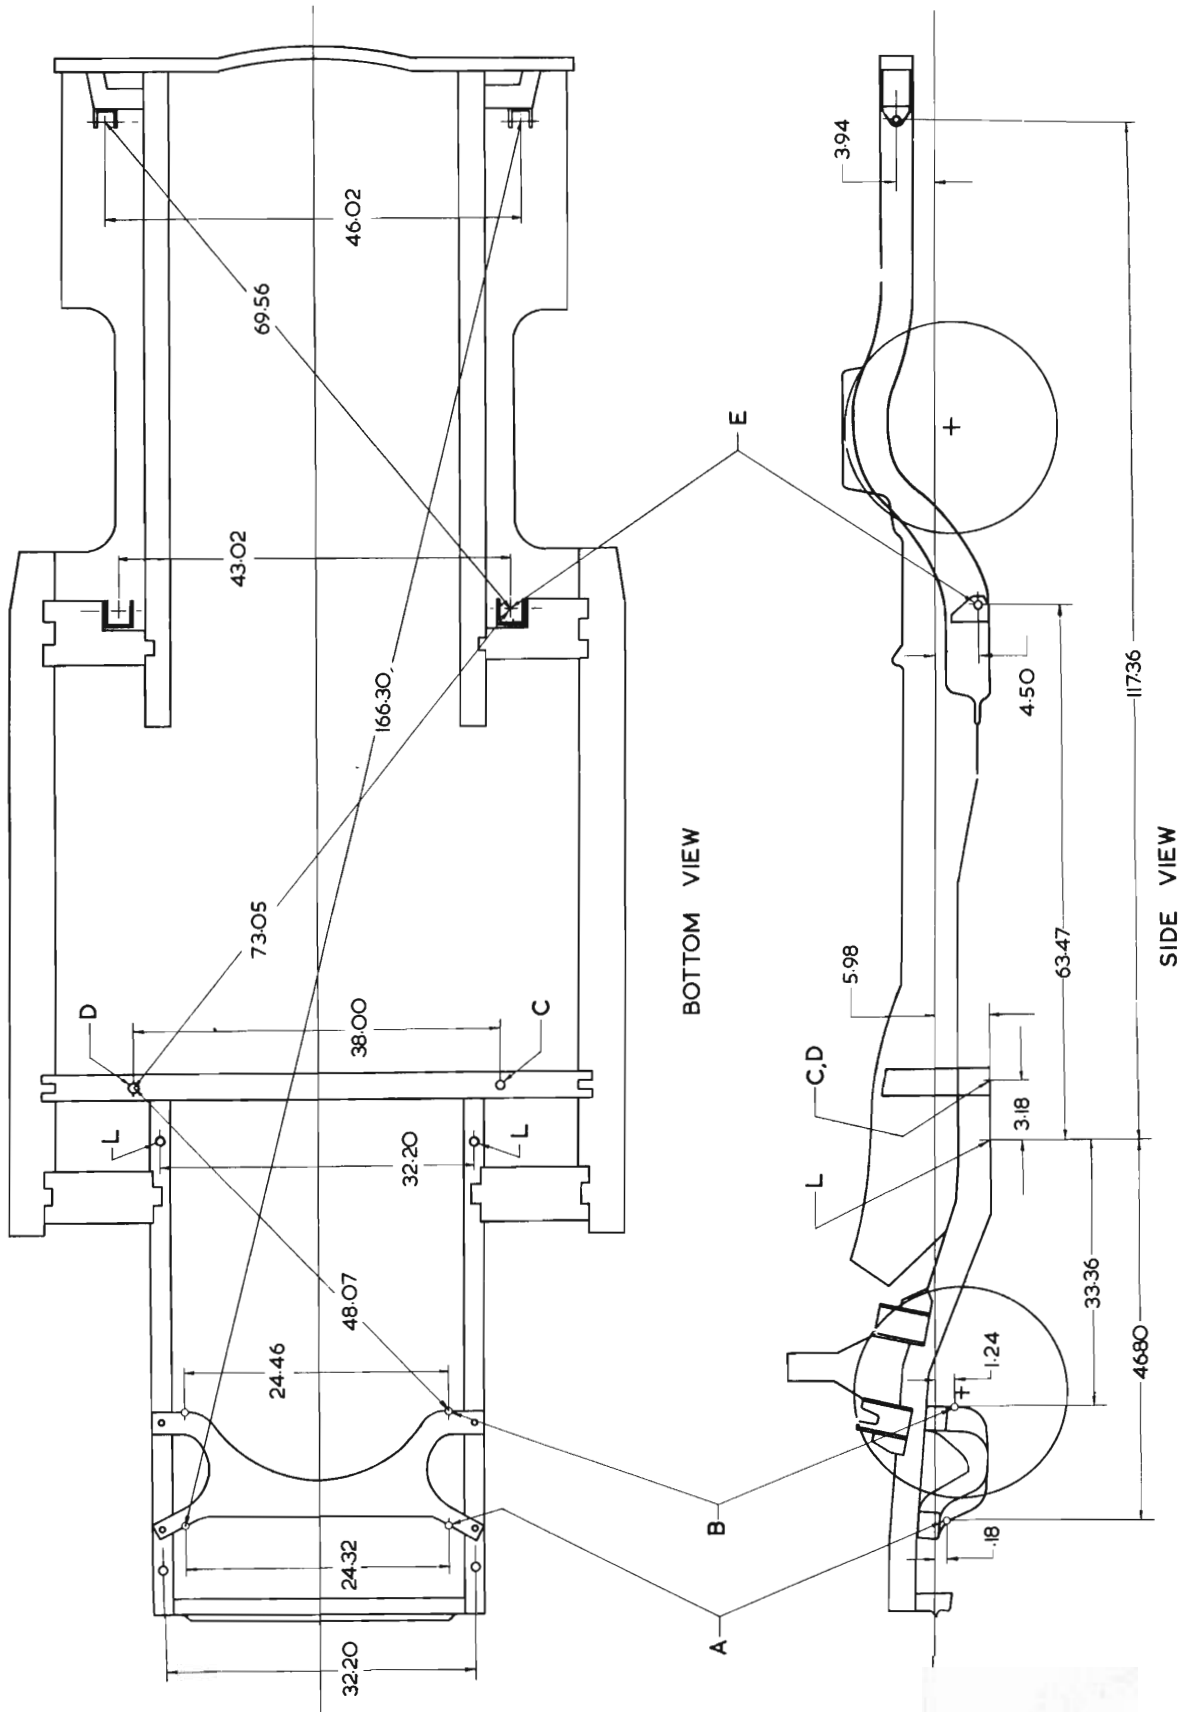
Body alignment dimensions (105" wheelbase models)
